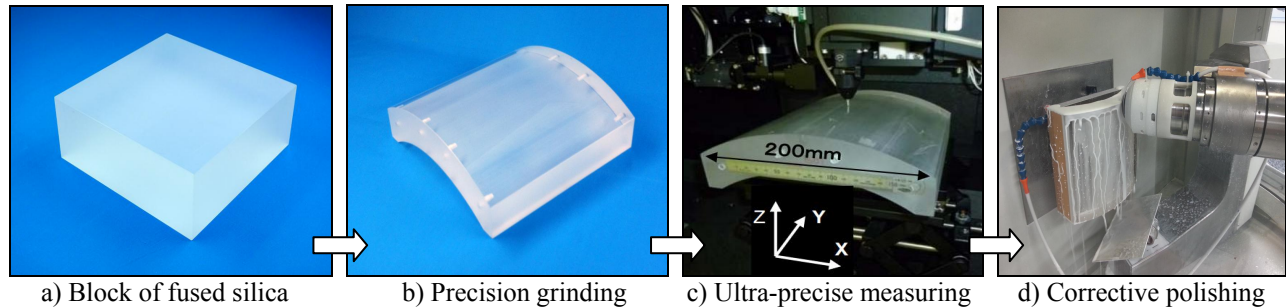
Process chain to fabricate X-ray molding die from fused silica block.
